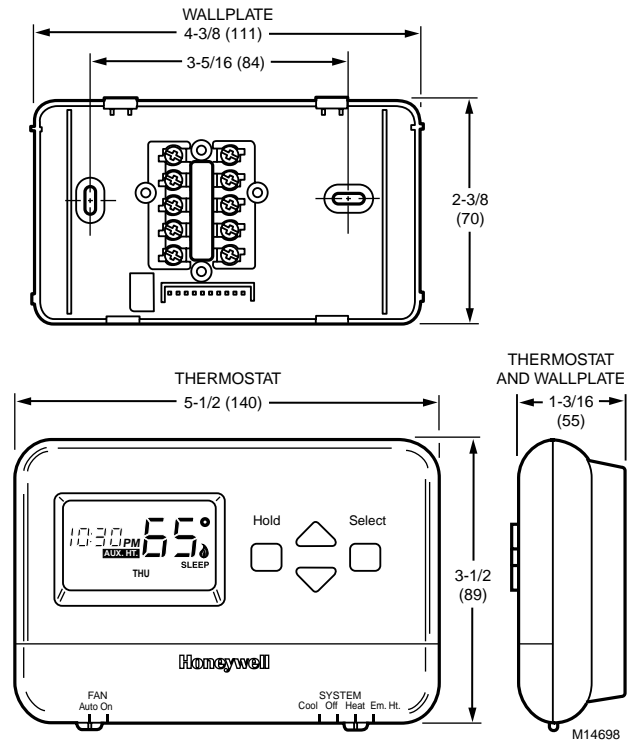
T8011R Thermostat dimensions in in. (mm).
